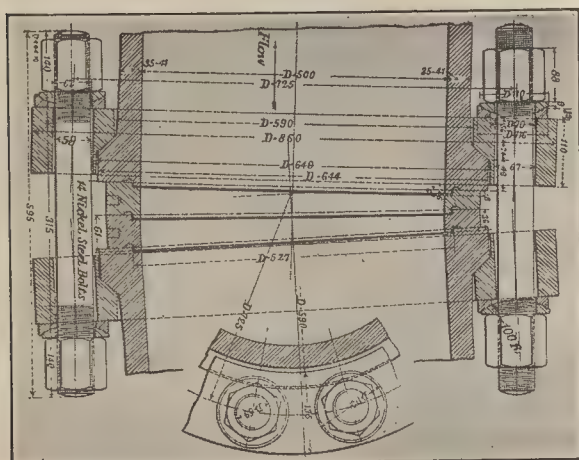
ADJUSTABLE HIGH PRESSURE JOINT USED AT 5000 FT. HEAT PLANT, AT FULLY, SWITZERLAND.
